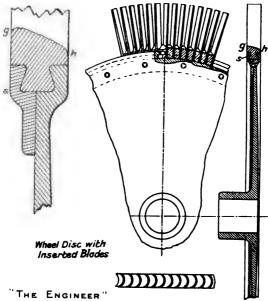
Revolving Wheel Disc with Blades inserted.
